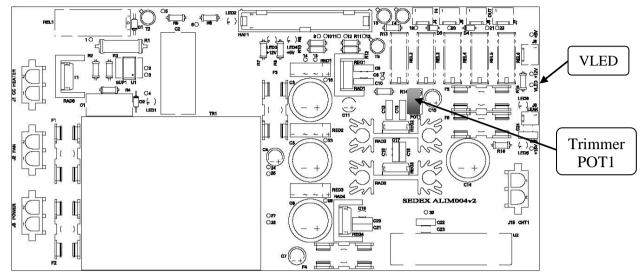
The ALIMO04V2 Board Lamp Setting
